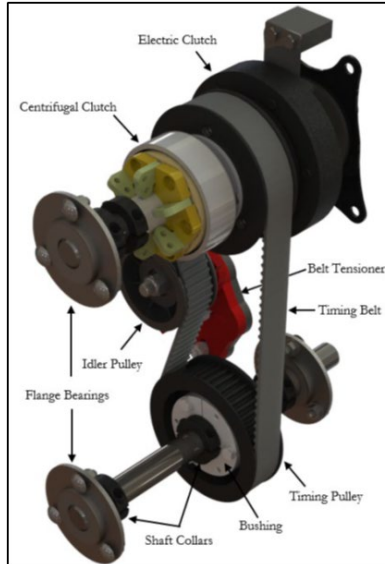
The Wildcat 3122 dual clutch assembly [8]
